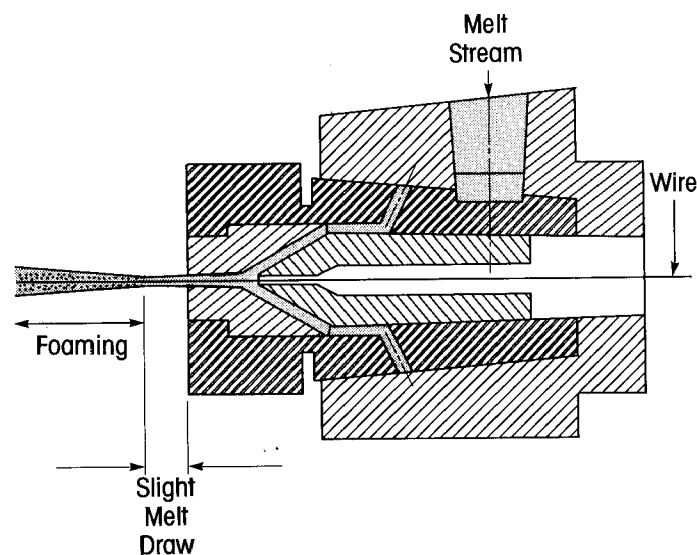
Maillefer 4/6F Wire Coating Crosshead, Single Extrusion
